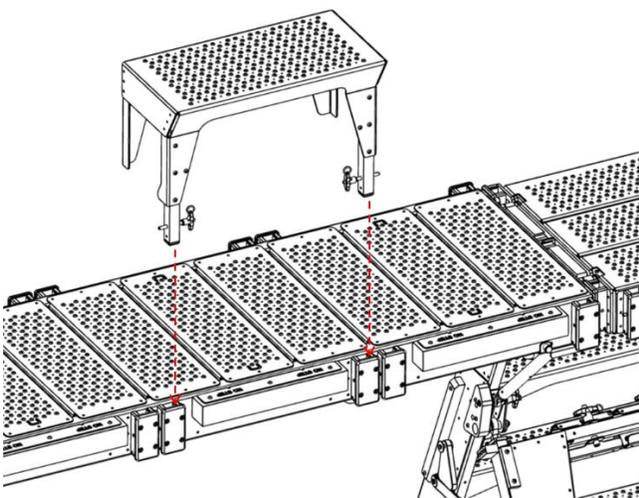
Place tapered tangs of Extension into Extension Receiver plates (guardrails not shown).
